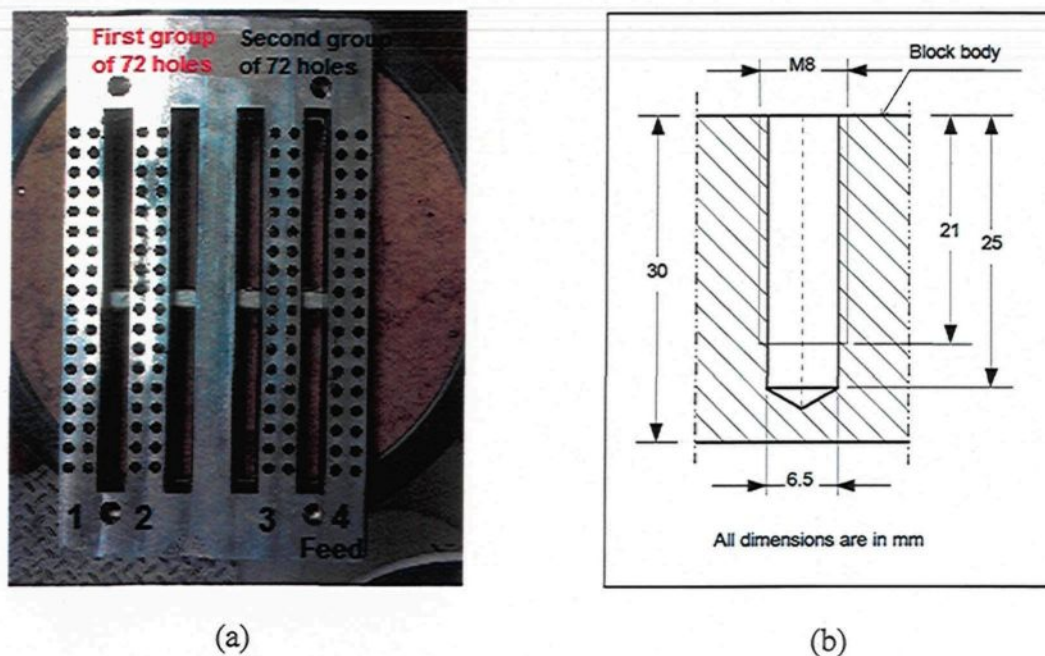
(a) Machinability test block after drilling; (b) dimensions of the resulting holes.
